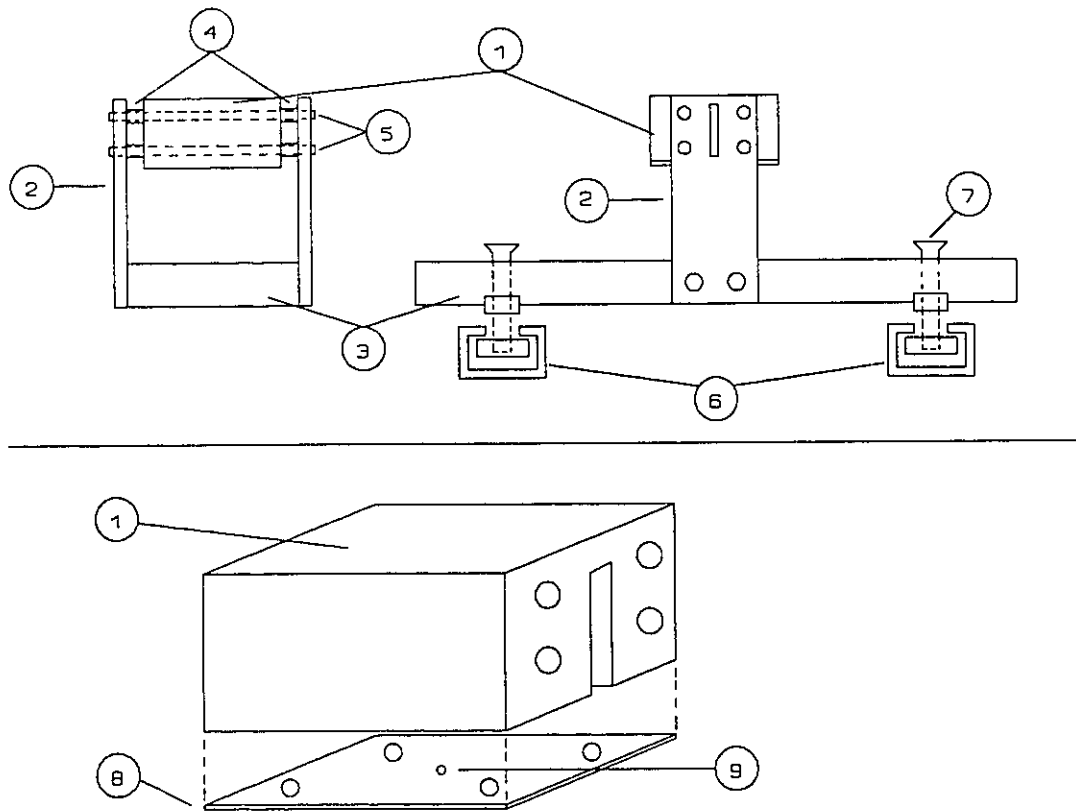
3FFR Collision cell, 1. collision cell body, 2. end plates, 3. mounting boat, 4. ceramic electrical insulators, 5. glass tubing, 6. optical rails, 7. boat - rail fastening bolts, 8. cell body bottom plate, 9. target gas inlet hole.
